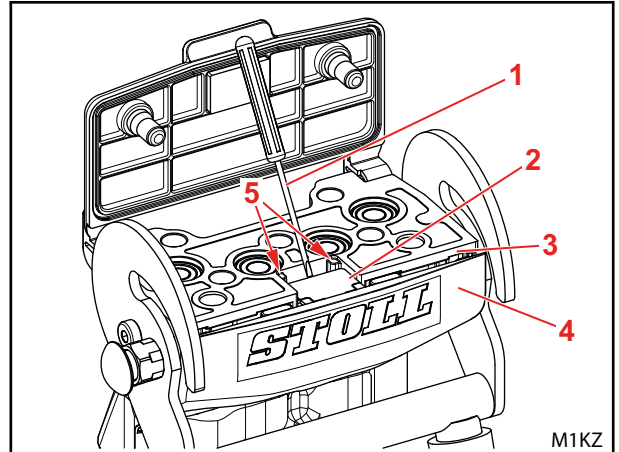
Installed Hydro-Fix lower part (without electrical system)
